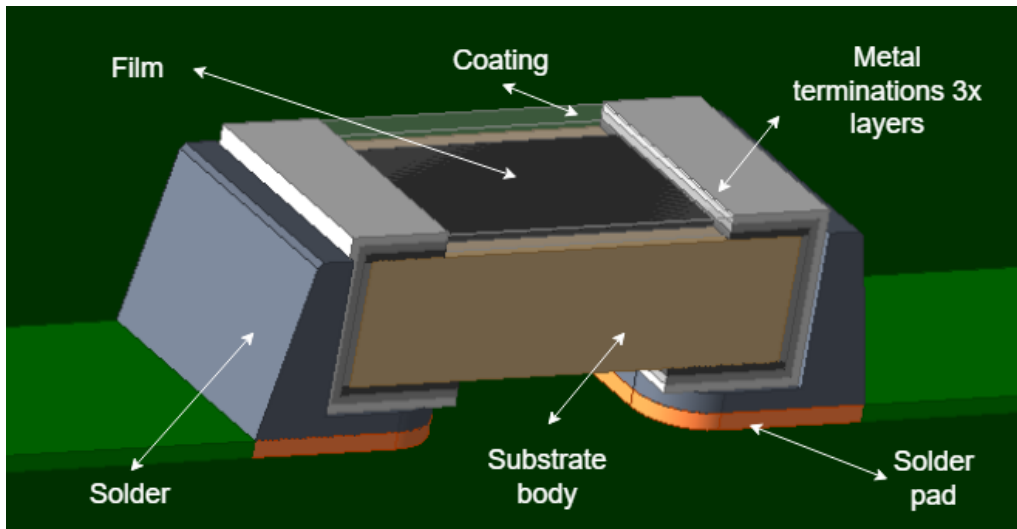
Cross section of a 0603 resistor with the solder structure clearly represented [14]
